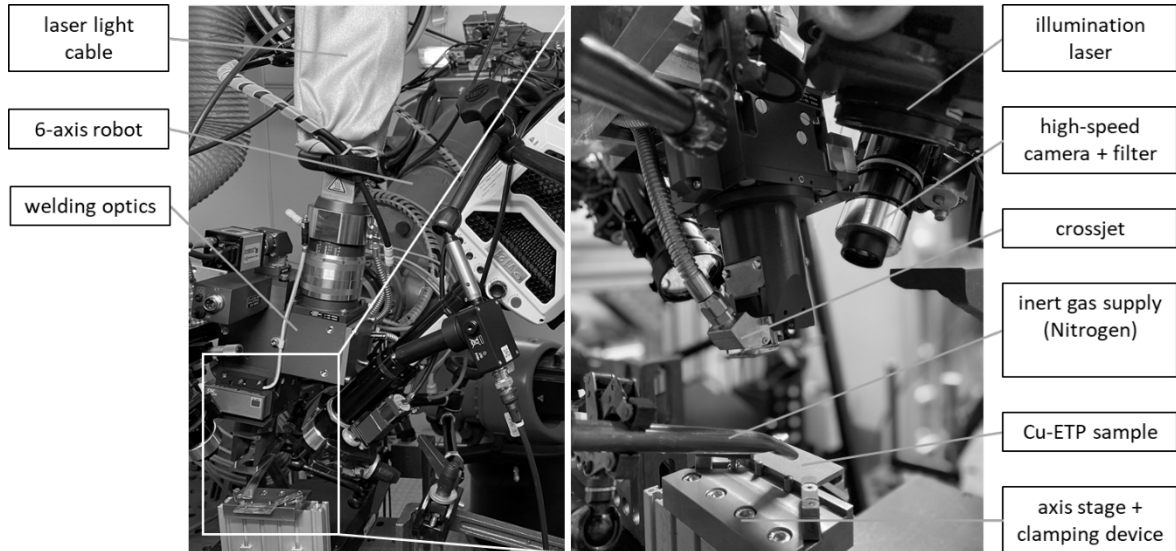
Experimental setup for laser beam welding with $\lambda = 515$ nm
